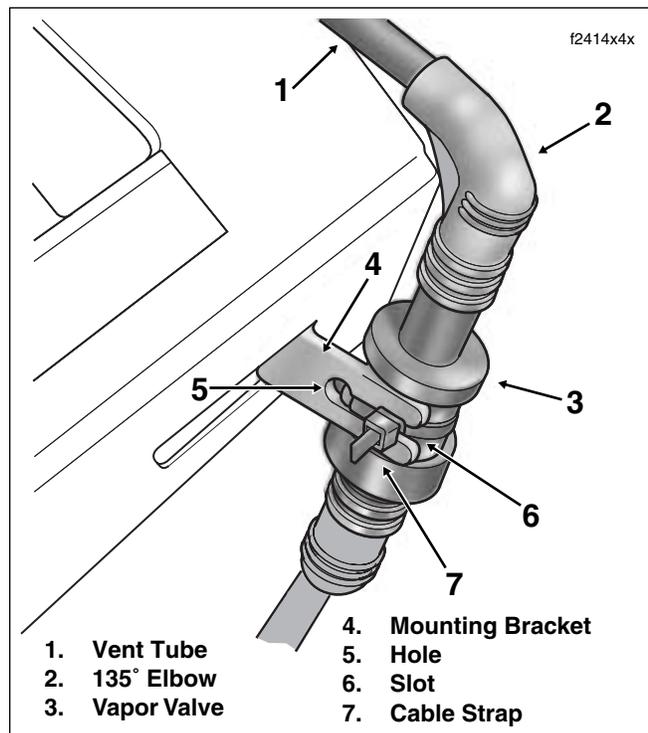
Vapor Valve Mounting Bracket (Left Side View)
